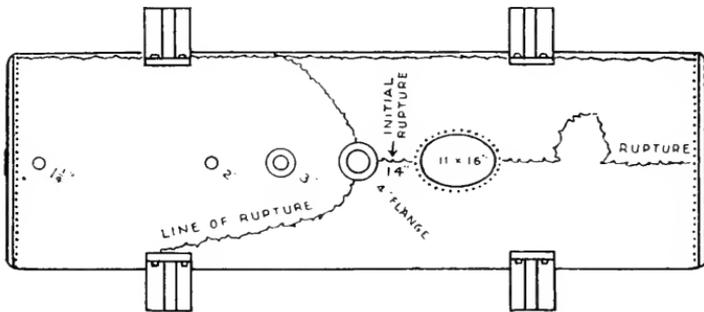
TOP VIEW OF BOILER, SHOWING INITIAL RUPTURE.
